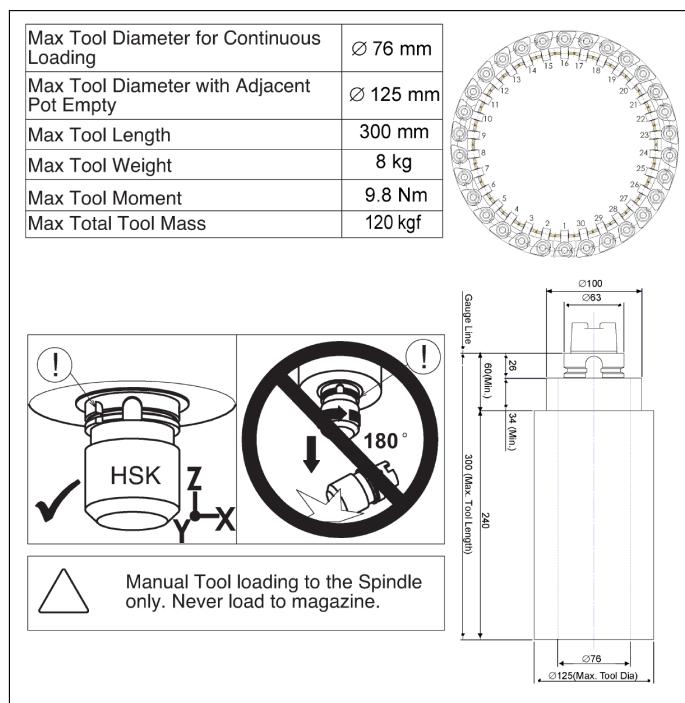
Standard HSK A-63 ATC30 Tool Shape Limits
